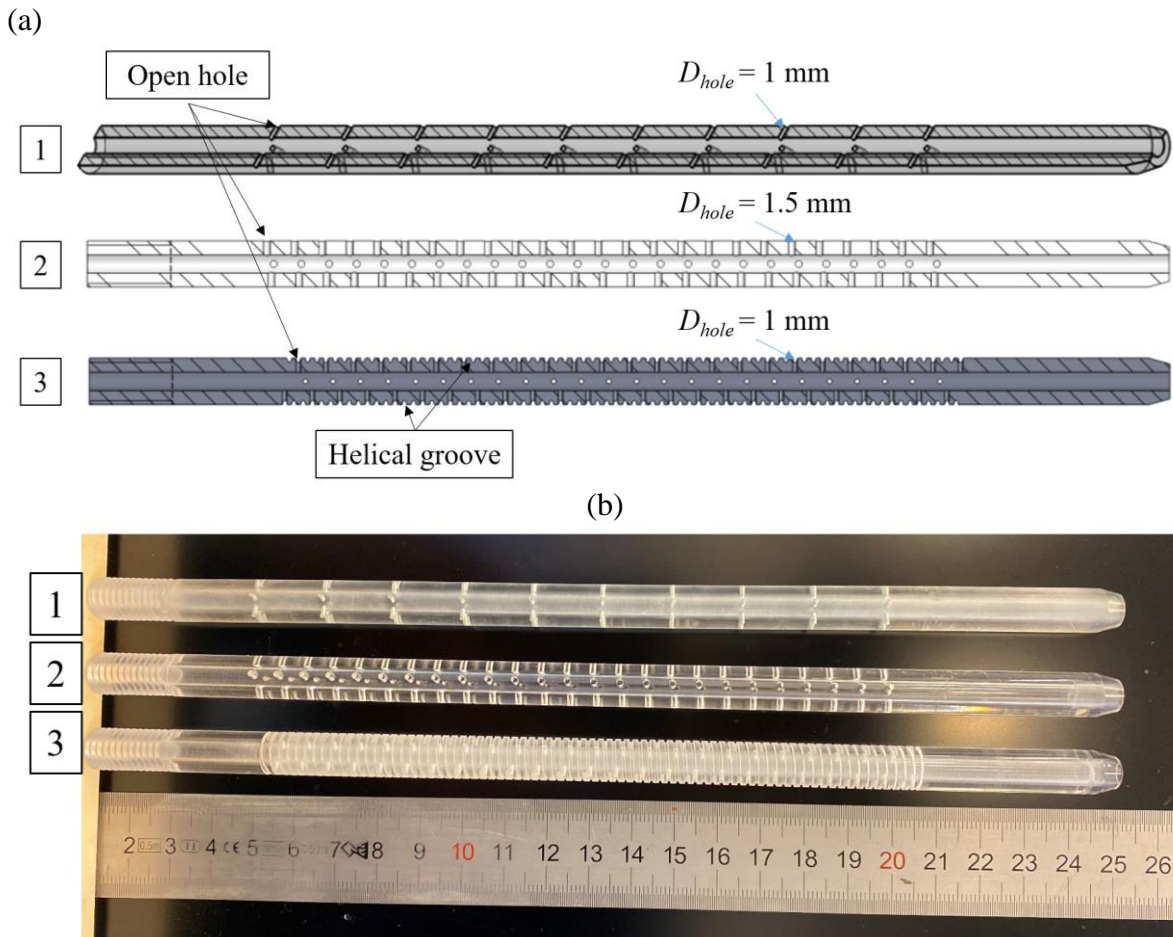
Three configurations of the injection tube used in the preliminary tests: (a) design; (b) view.
